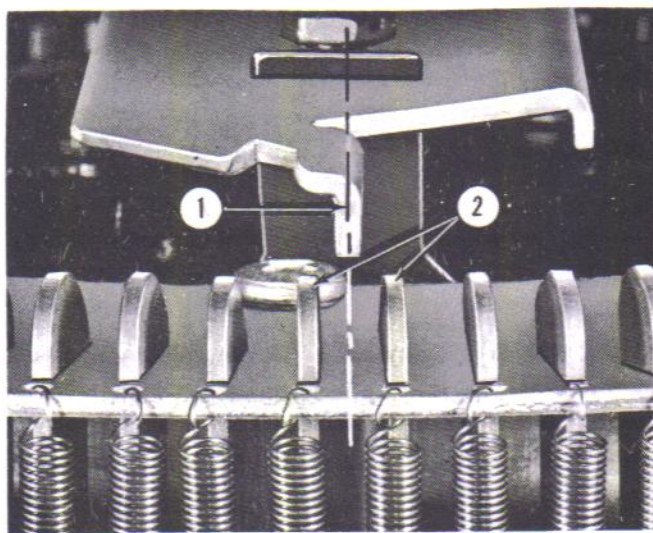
SELECTOR CRANK ARM CENTERING, 2504
